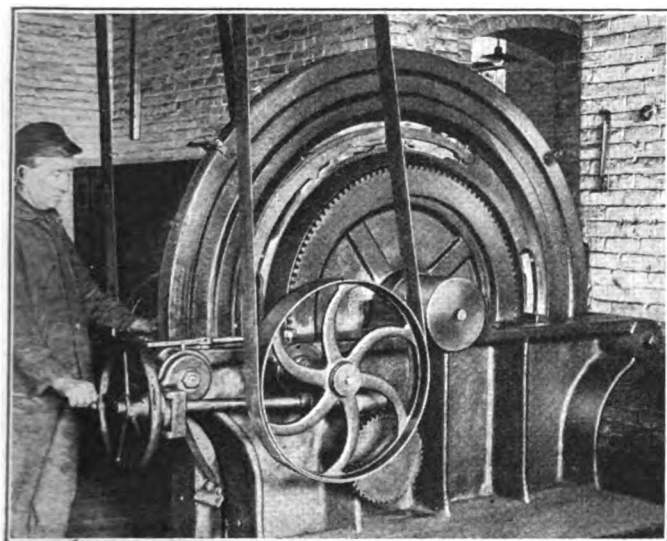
FLEXIBLE BEND MILLING MACHINE
